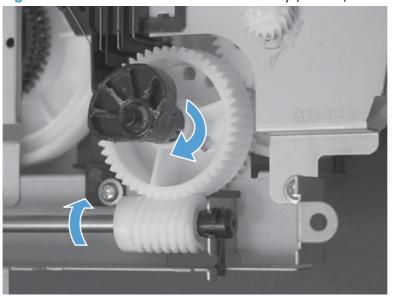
Reinstall the main drive assembly (3 of 11)
